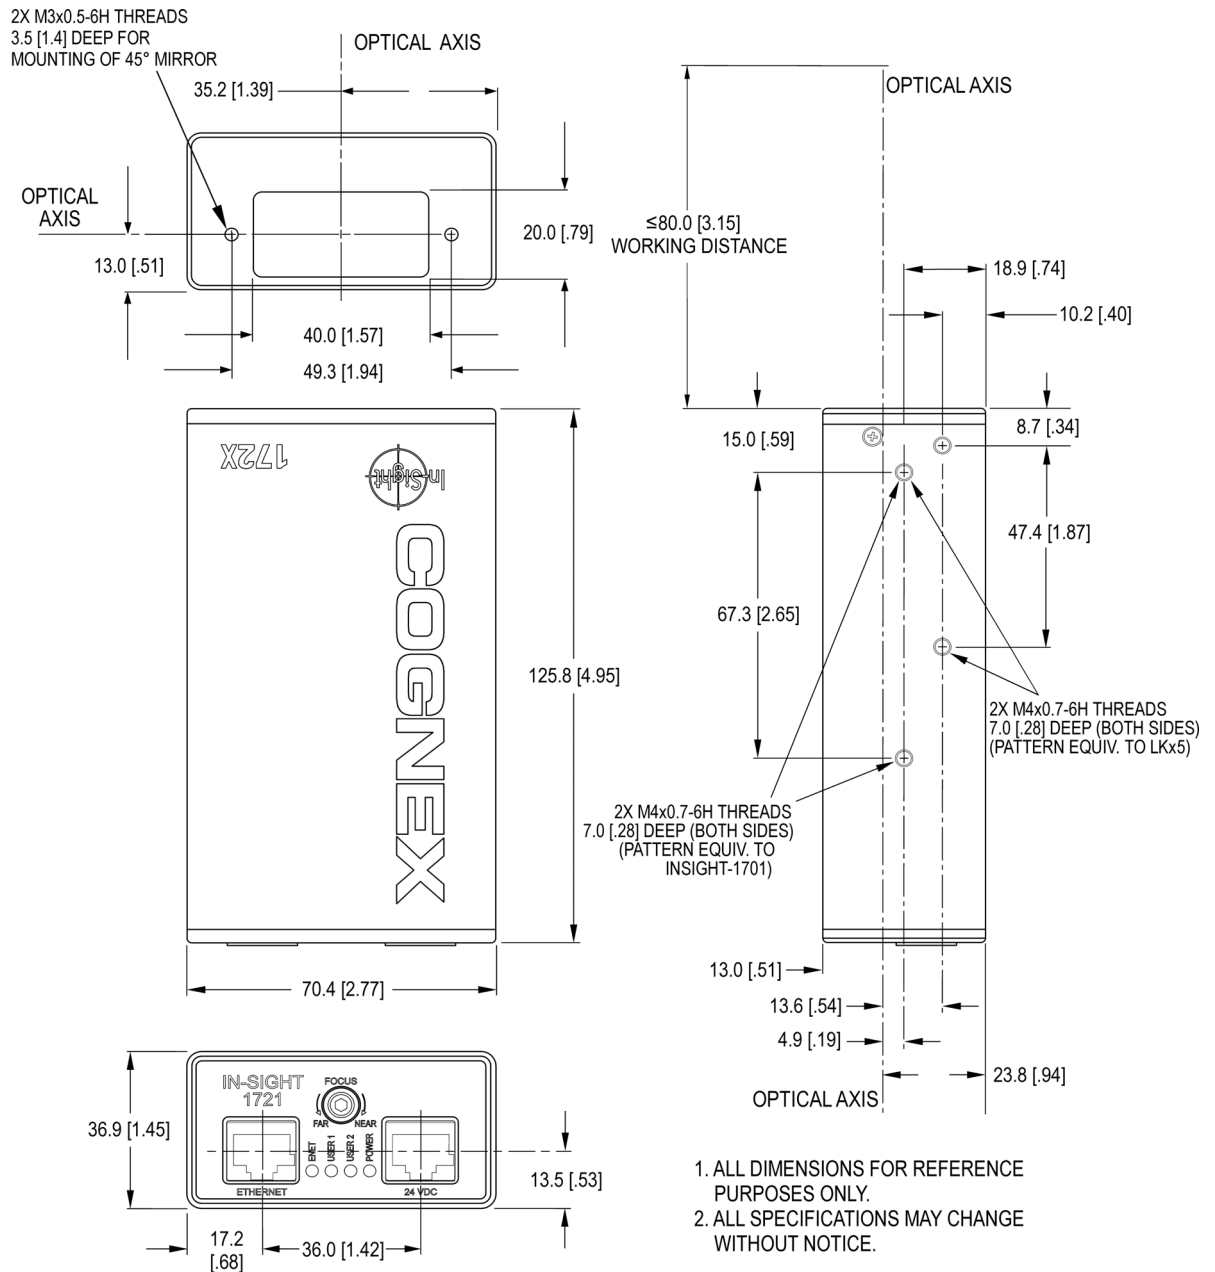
In-Sight 1721/1722 Wafer Reader Dimensions
